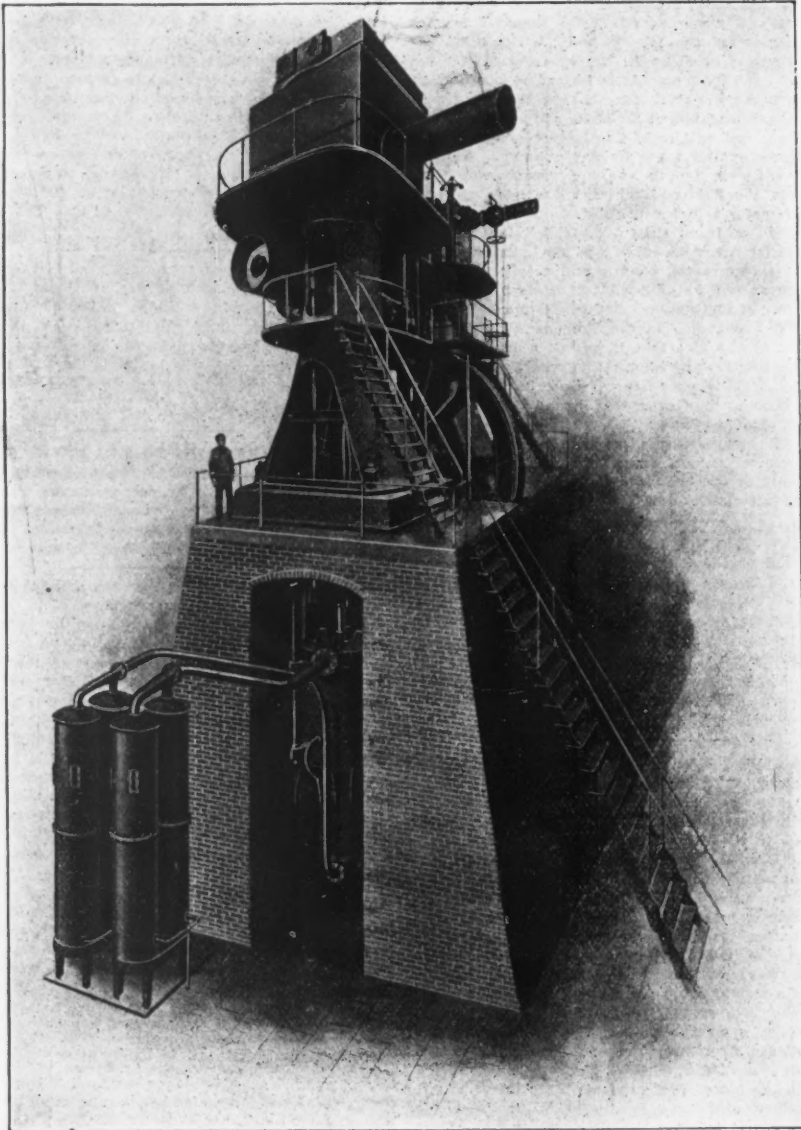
PERSPECTIVE VIEW OF A 1,500-HP. AIR COMPRESSOR.
